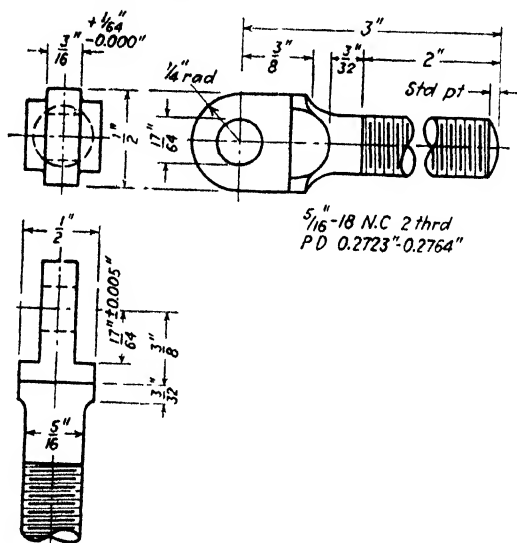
Eyebolt made by heading, the flats at the eye being broached.
